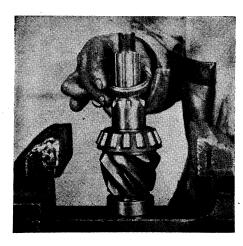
Lift off pinion bearing cage, bearing and washer. Slip off pinion bearing spacer
